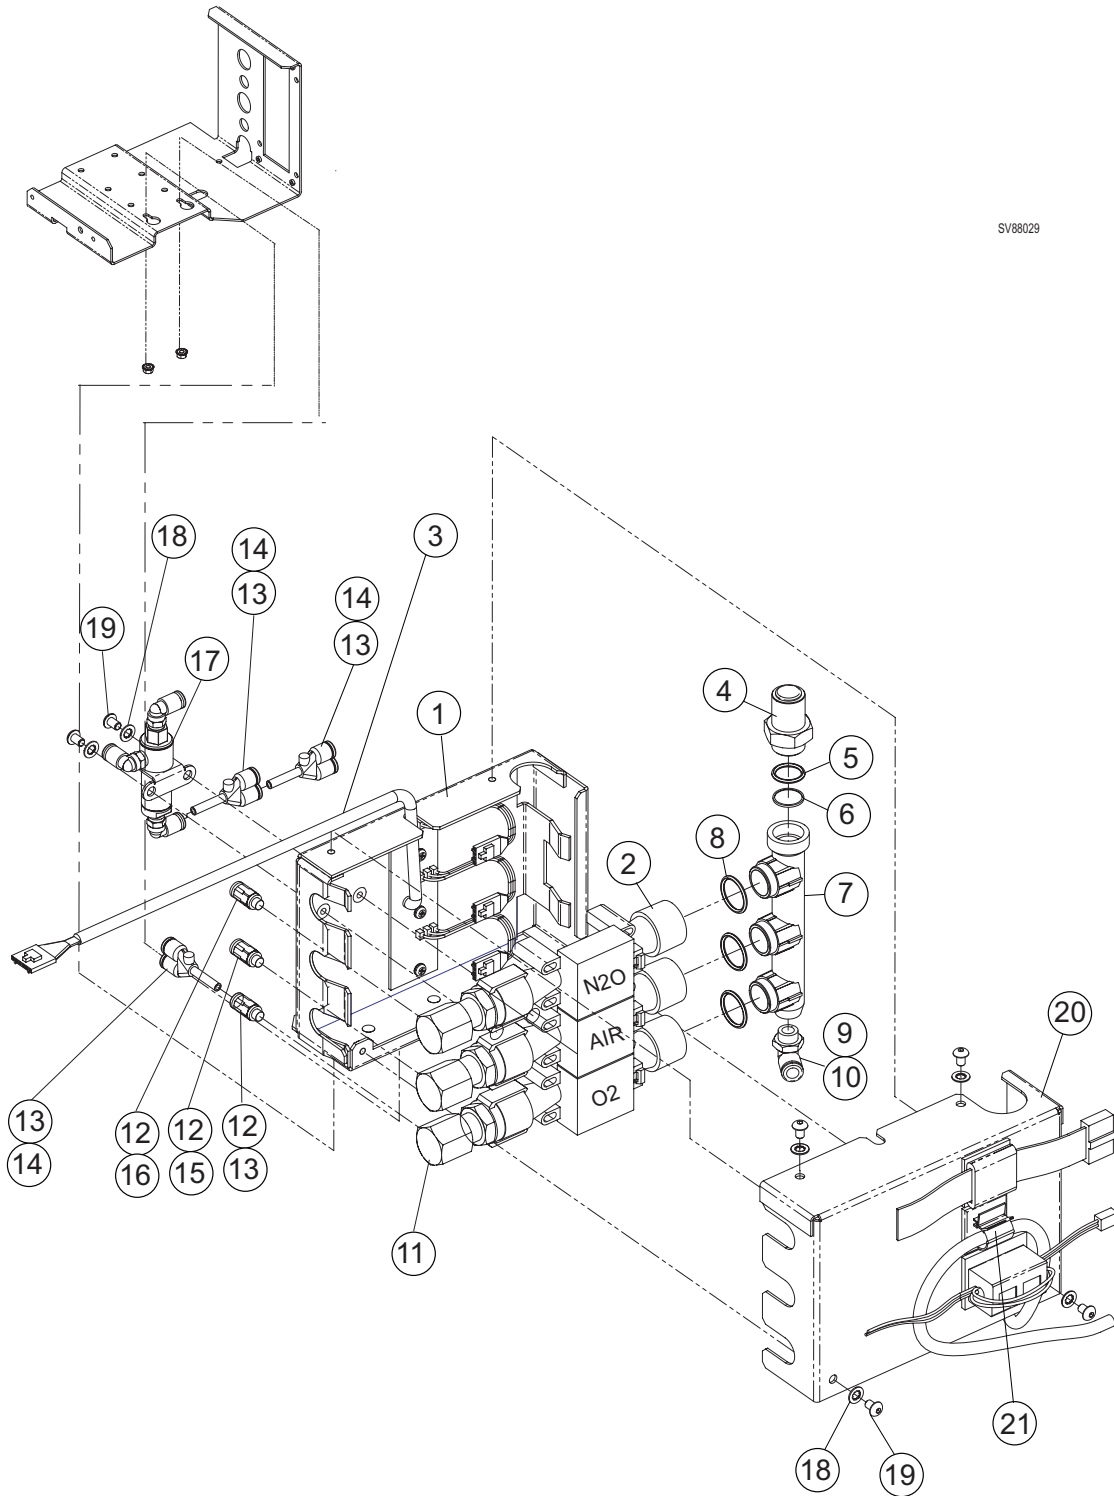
Fresh Gas Flow Sensors and Filter Assembly (part of Flowmeter Bezel Assembly 4118287 or 4118288)
